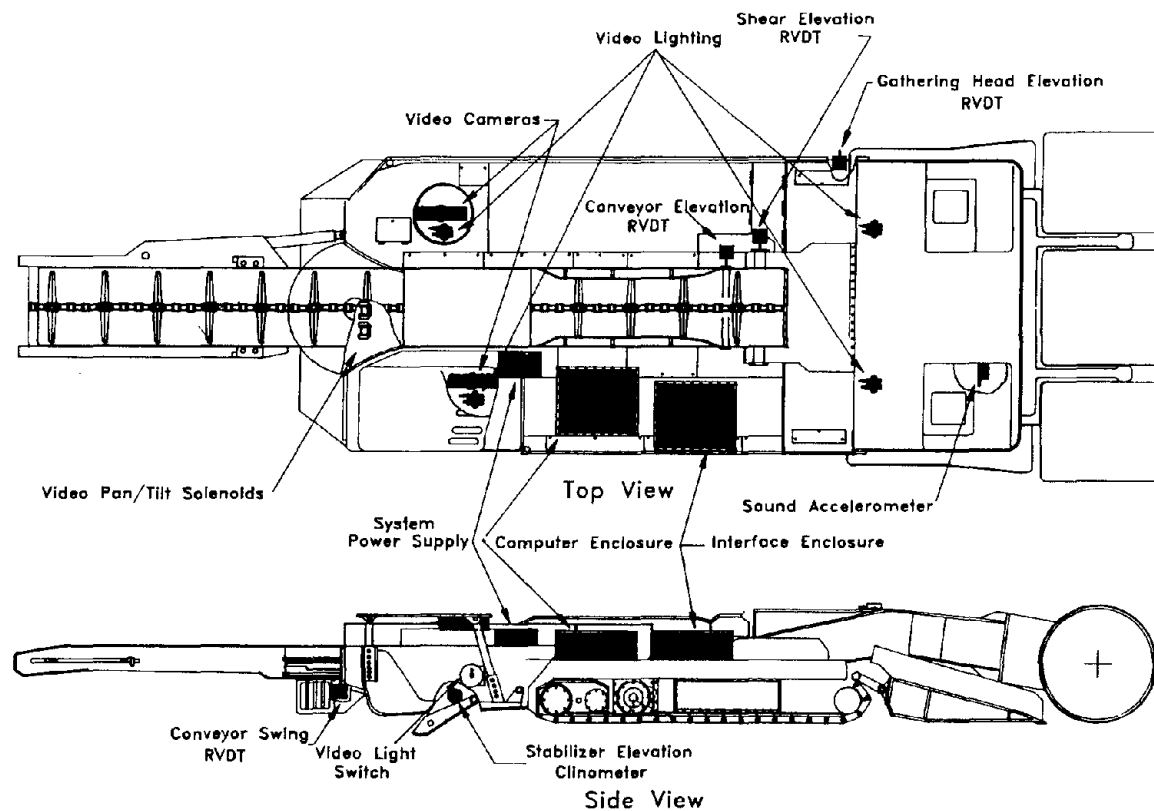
Schematic of an altered Joy 14CM mining machine with angular position measurement sensors to all moving parts, television cameras, and several large explosion-proof housings for machine control electronics and computer systems.
